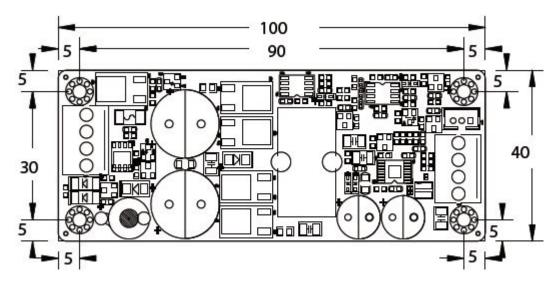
IDD-241100/481100 Dimension Drawing (measurement units: millimeter)
